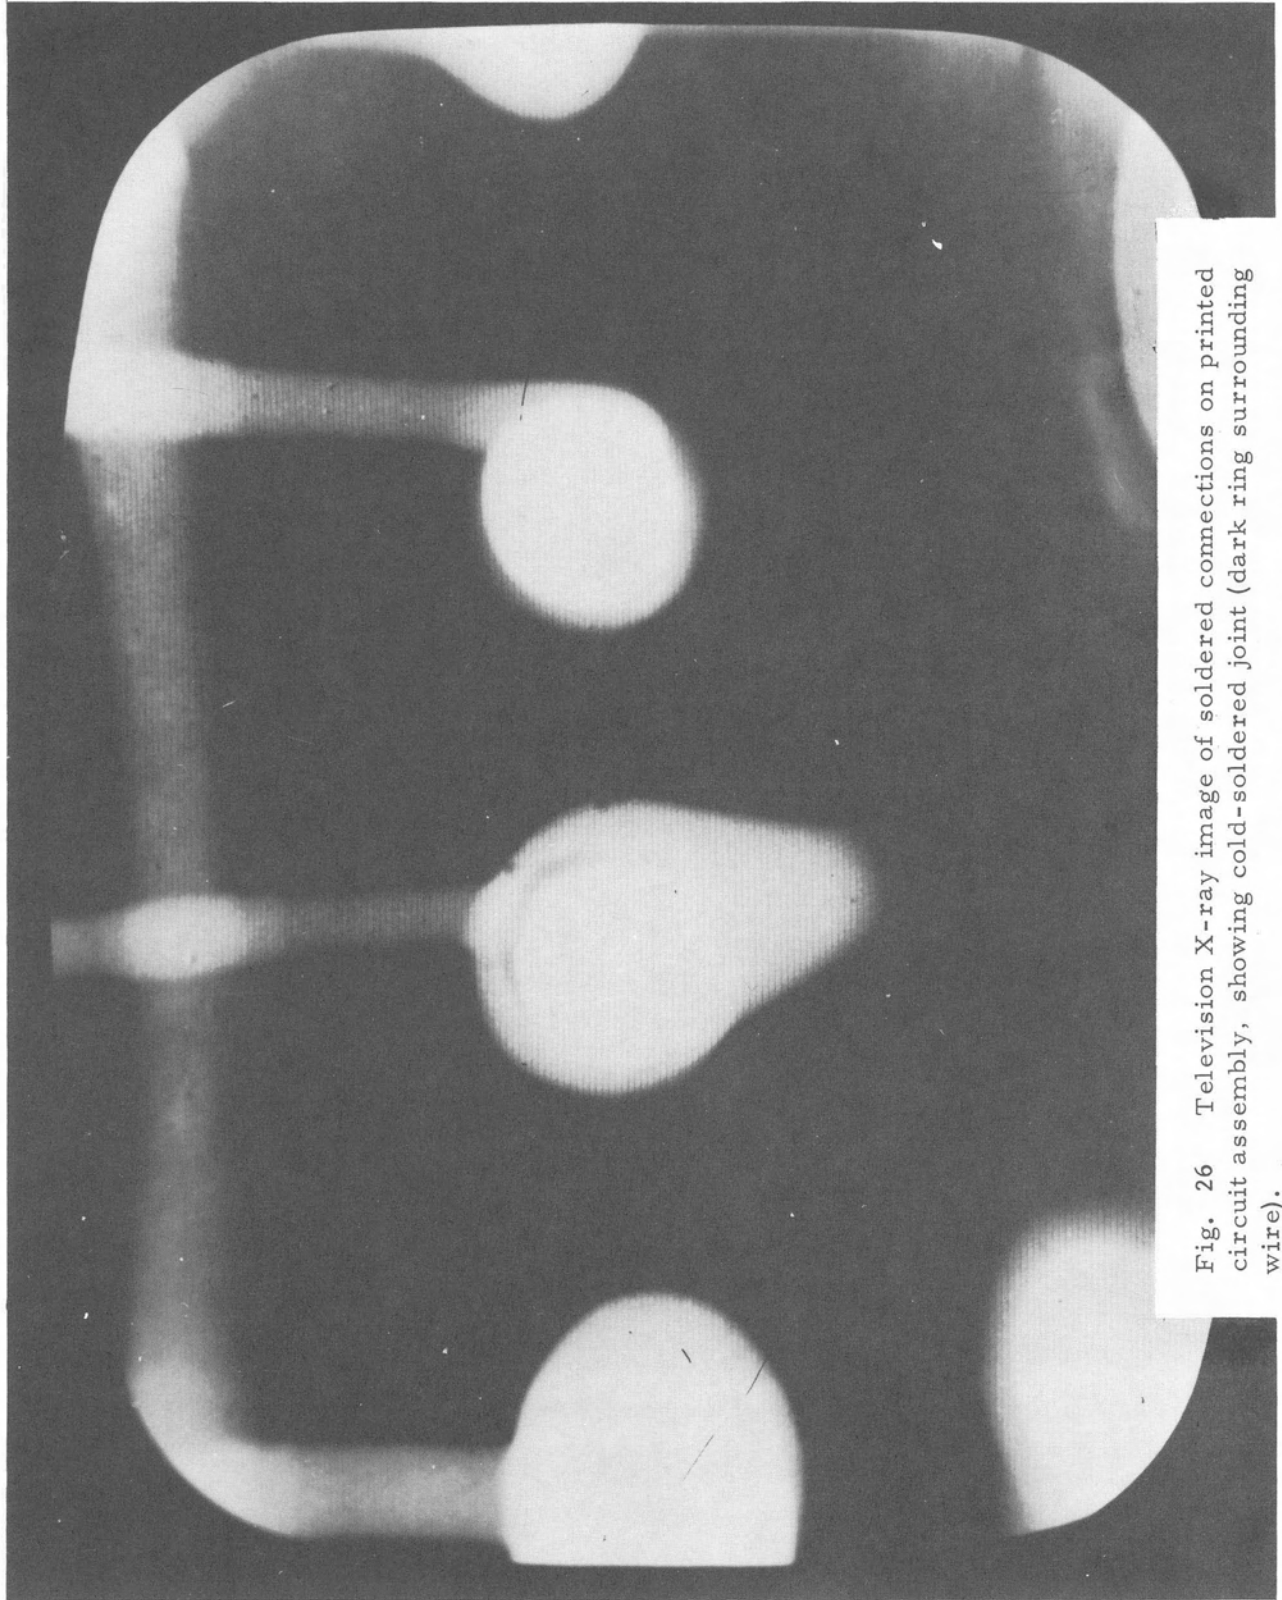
Television X-ray image of soldered connections on printed circuit assembly, showing cold-soldered joint (dark ring surrounding wire).
